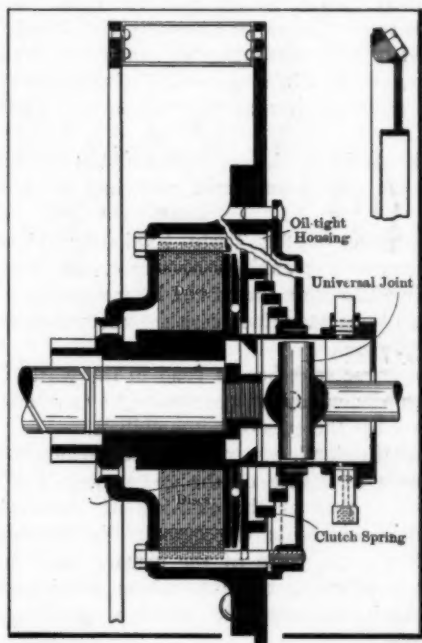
Section through the flywheel showing the nesting of the clutch and means for pulling air through conduits around motor cylinders
